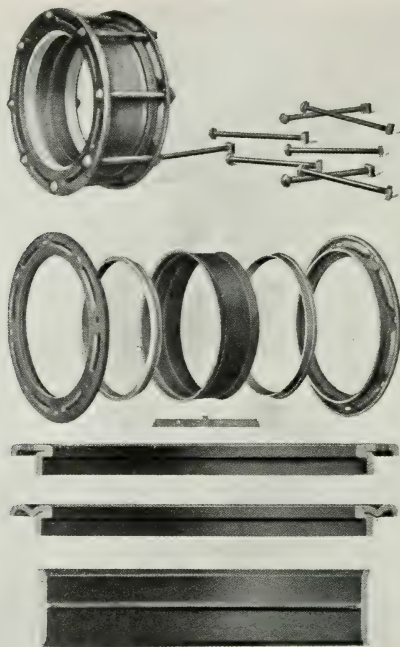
PLAIN END PIPE COUPLING SHOWING PARTS AND SECTIONAL VIEW OF RINGS
